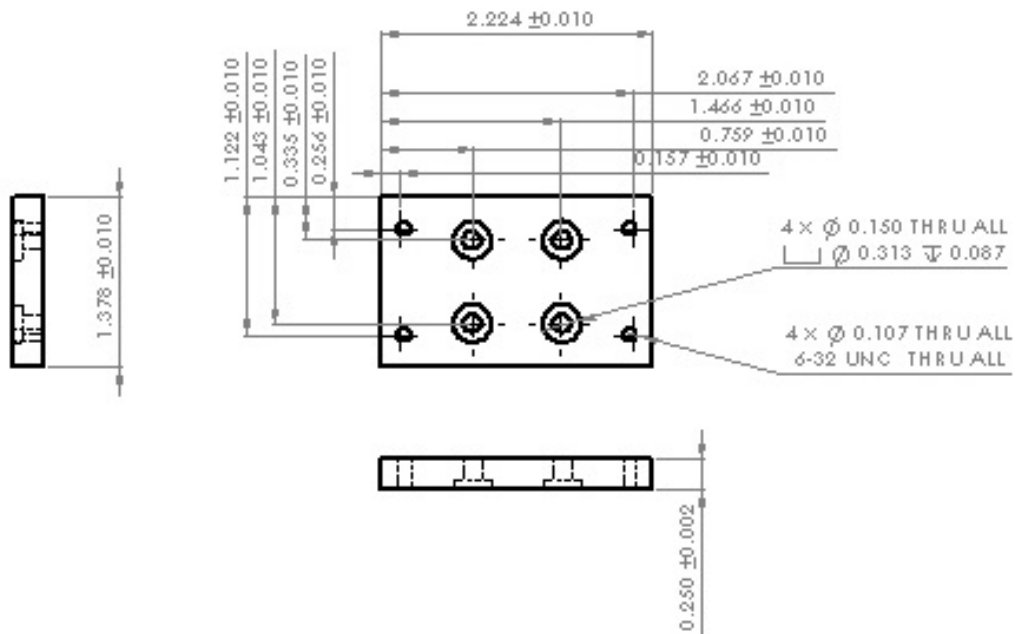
The structural piece clamping the flexure between the bottom thermal stack and the shaft.
